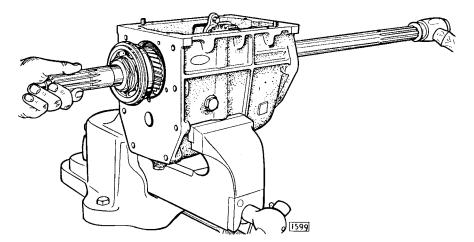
The constant pinion shaft is removed by tapping the mainshaft forward.
